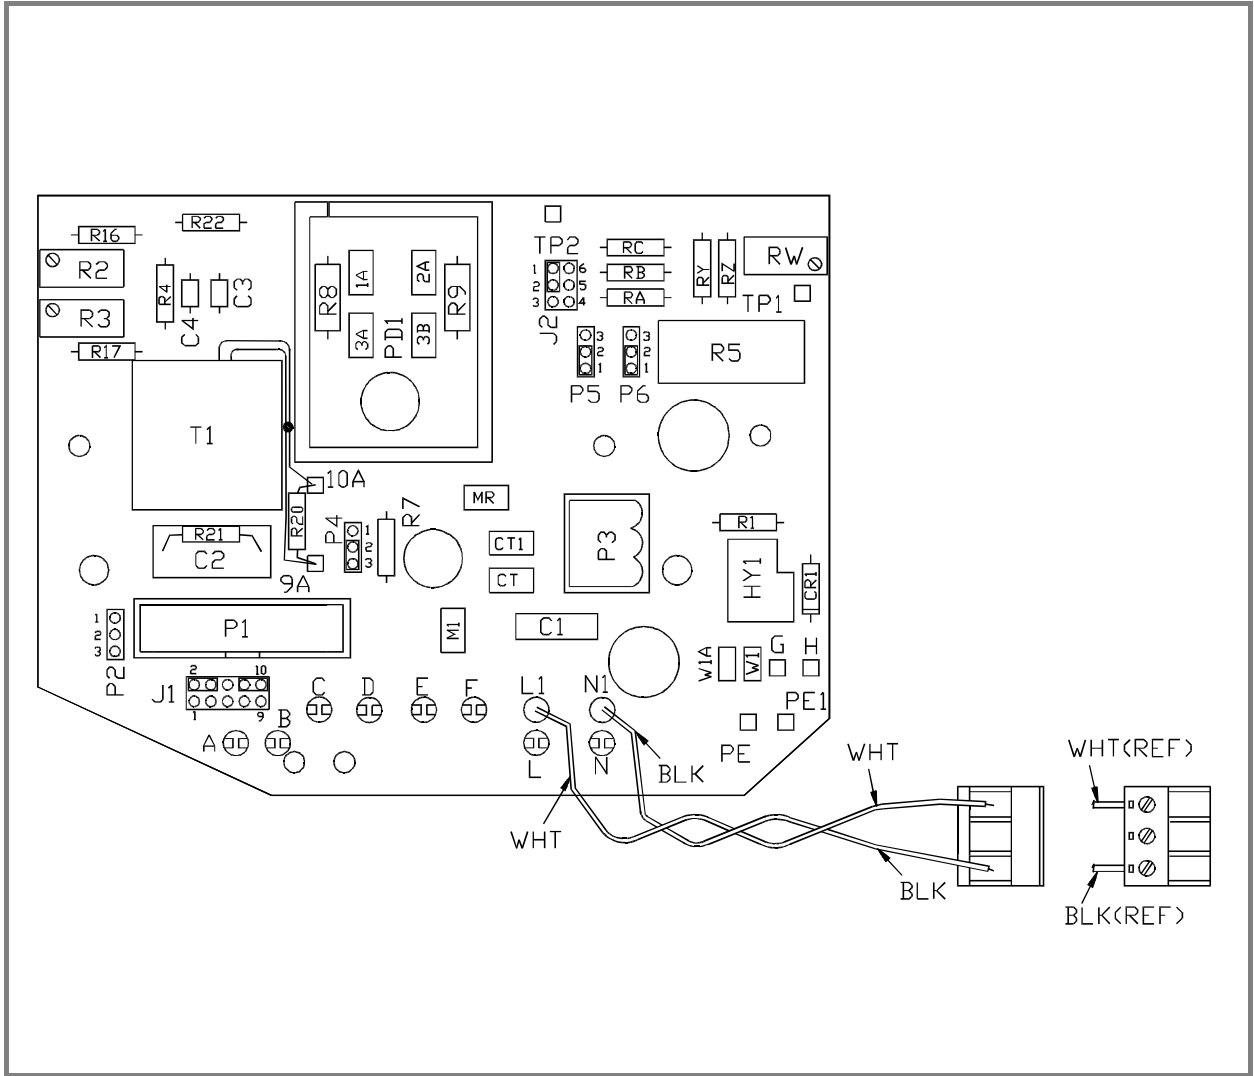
686B762U02 PRIMARY BOARD ASSEMBLY
